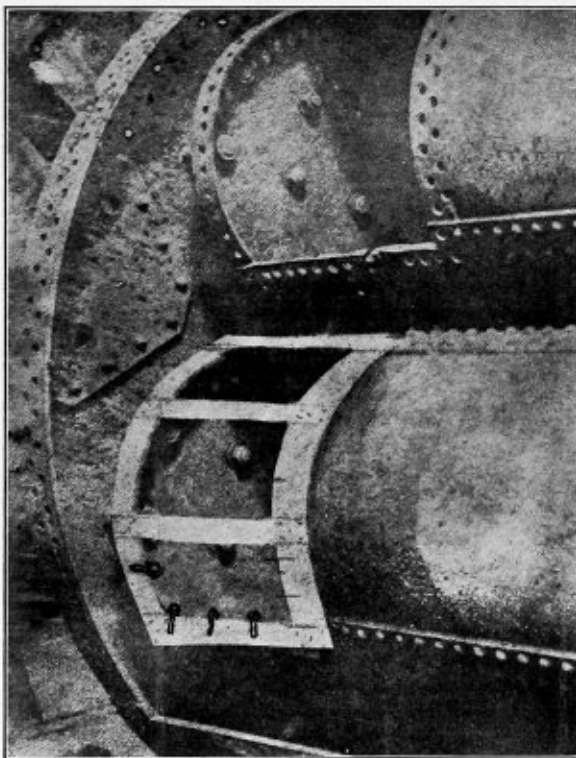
TEMPLATE FOR COMBUSTION-CHAMBER PATCH.
